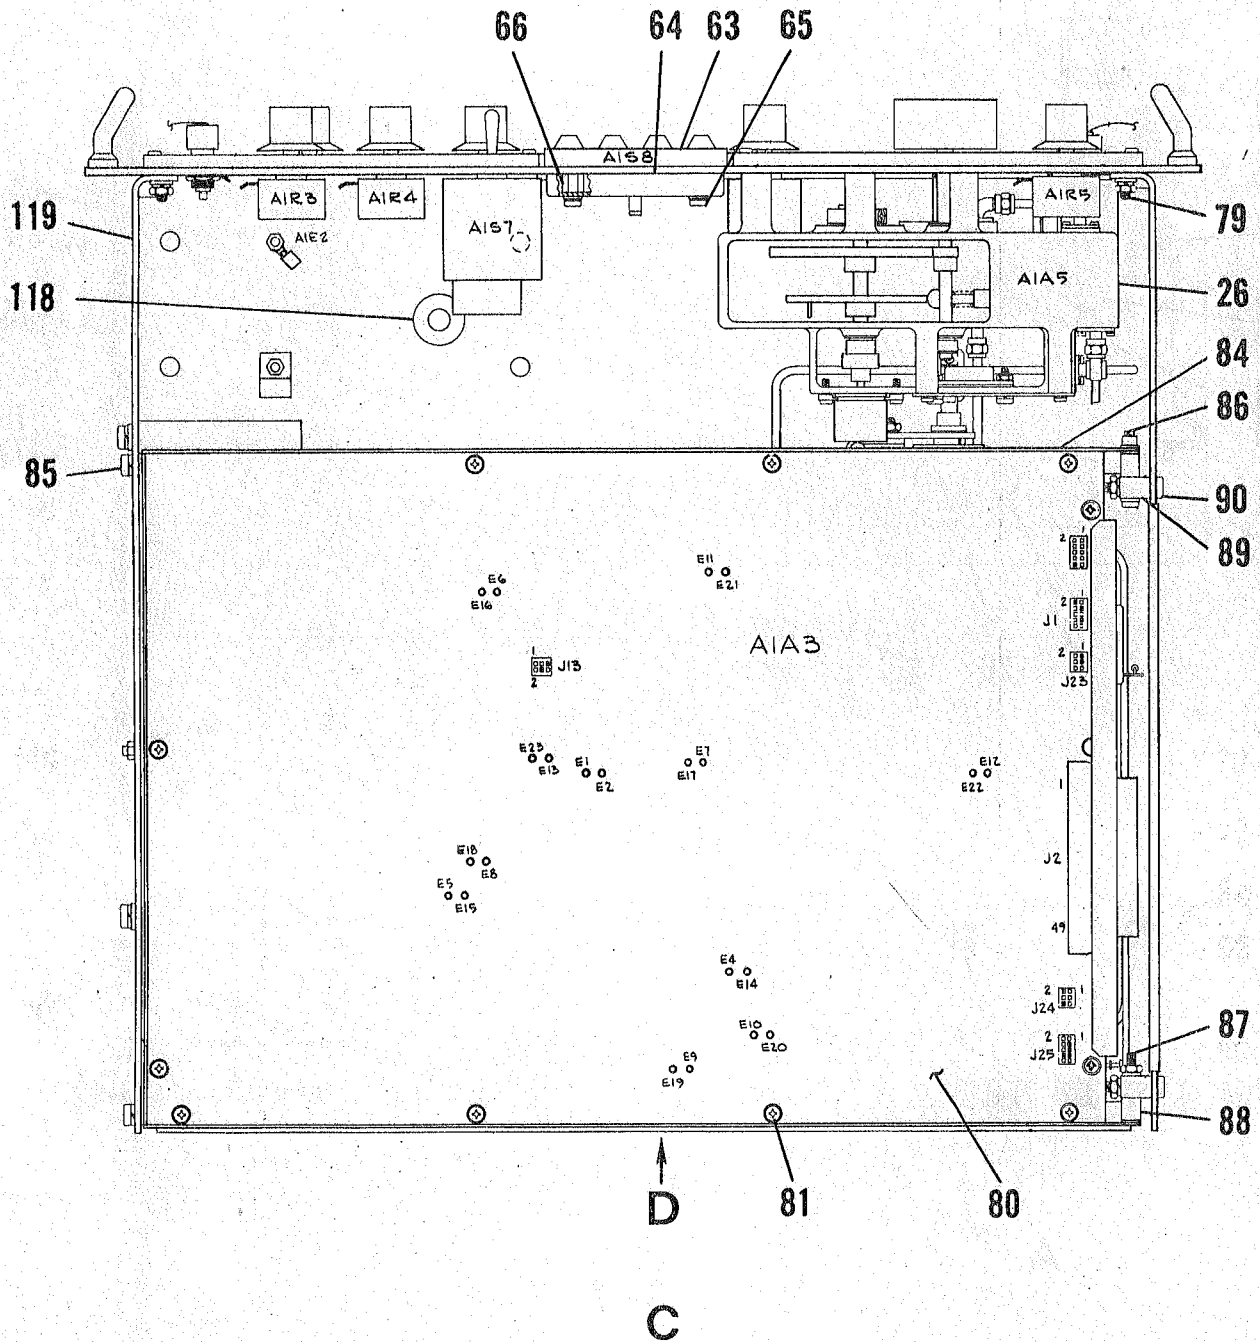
Test Set, Electronics Assembly (Sheet 2 of 6)
